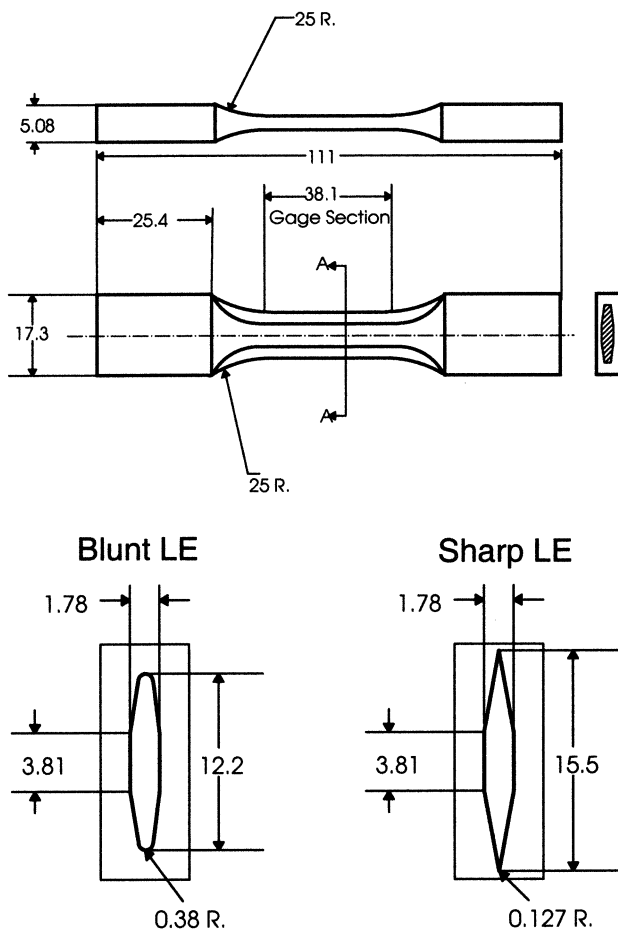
Diamond cross-section test specimen, dimensions in millimeters (mm).
